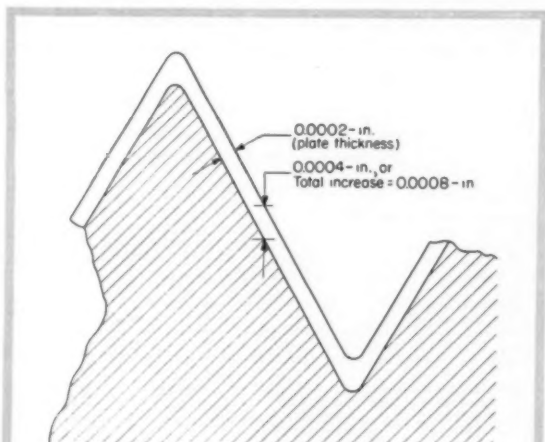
Plated coating on an external screw thread showing build-up on pitch diameter.
